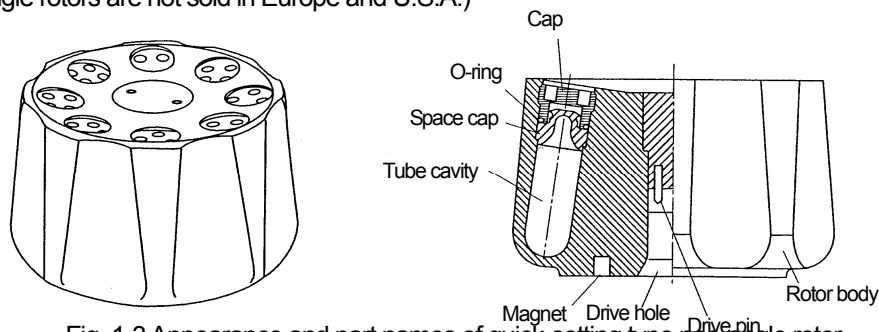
Appearance and part names of quick-setting type neo-angle rotor
